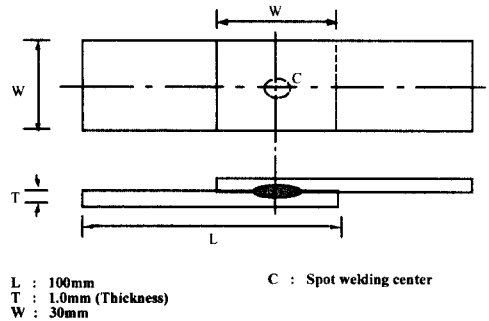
The schematic diagram and dimensions of spot welded fatigue test specimen
